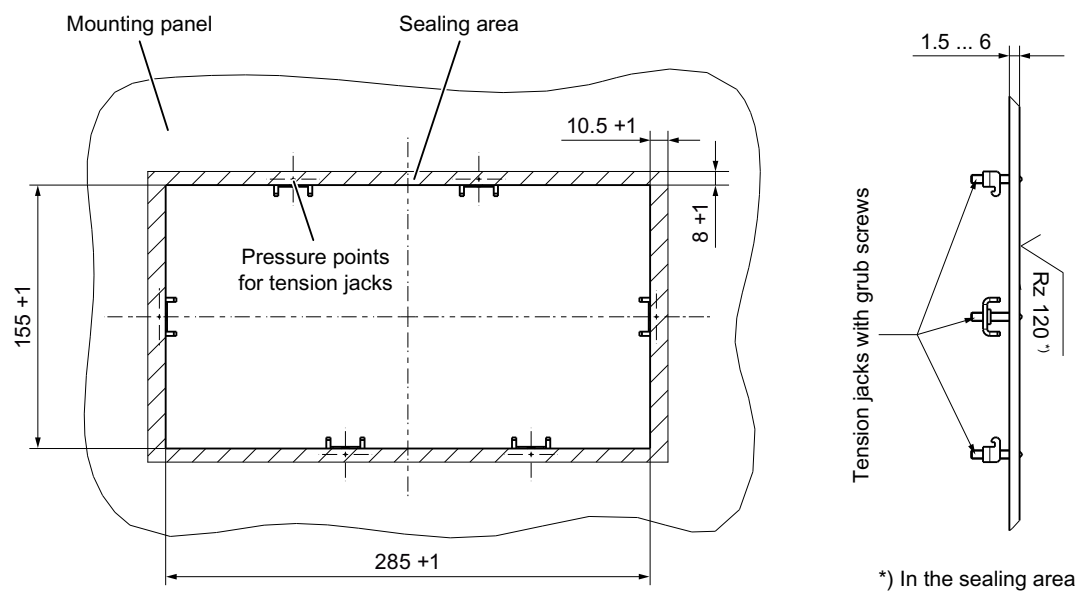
Panel cut-out for the machine control panel MCP 310C PN
